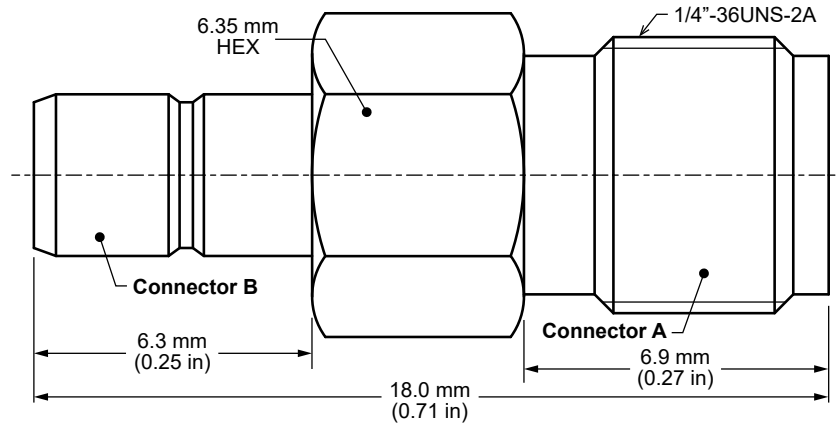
Product Dimensions for the ADP-SMAF-SMBF-G Adapter
